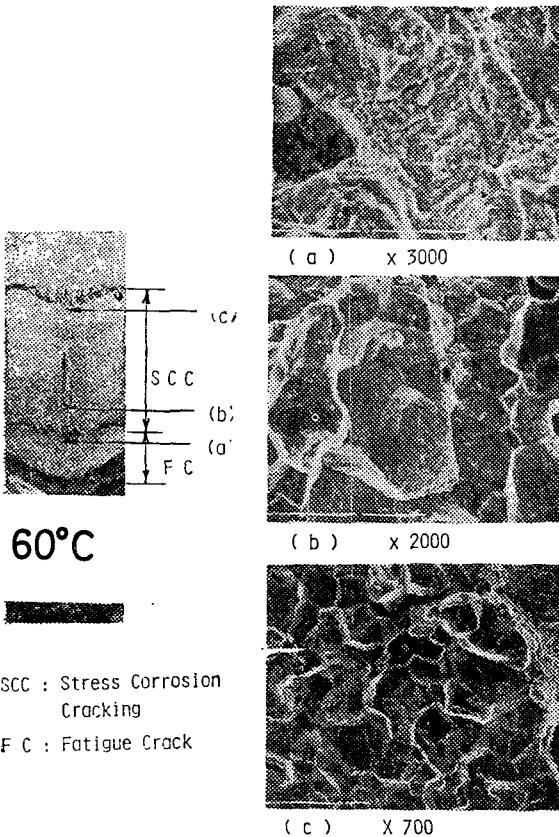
Fractures modes found on fracture surfaces of SCM-4 SCC specimen. (a) fractograph of fatigue fracture surface of pre-crack; (b), (c) IG (Inter-granular) crack formed.
